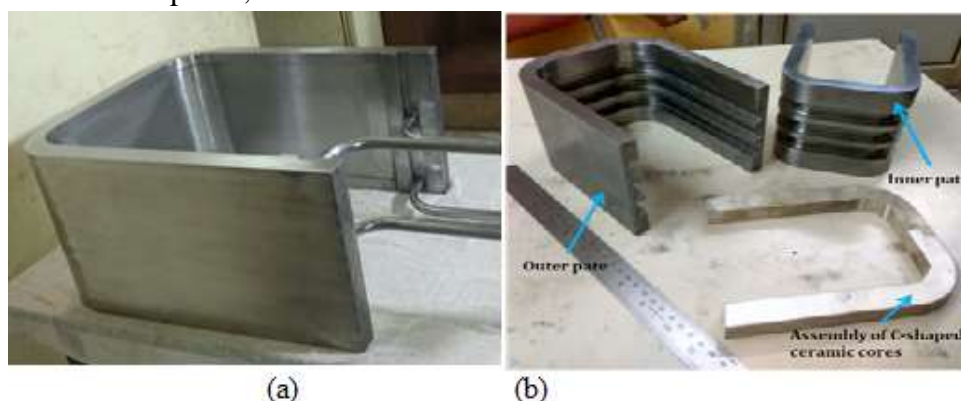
channels U-shaped FW with ends welded and inlets & outlets of each circuit and (b) prototype demonstration of manufactured U-bent inner and outer plates with CNC C-shape grooved channels and curved ceramic cores.
